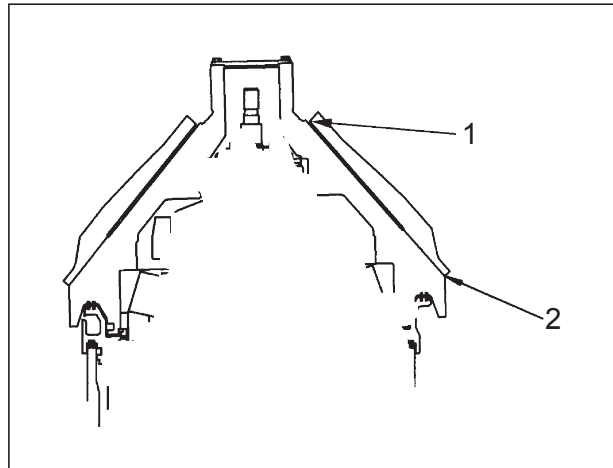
Section through the Cone Head Showing Correct Filler Level
